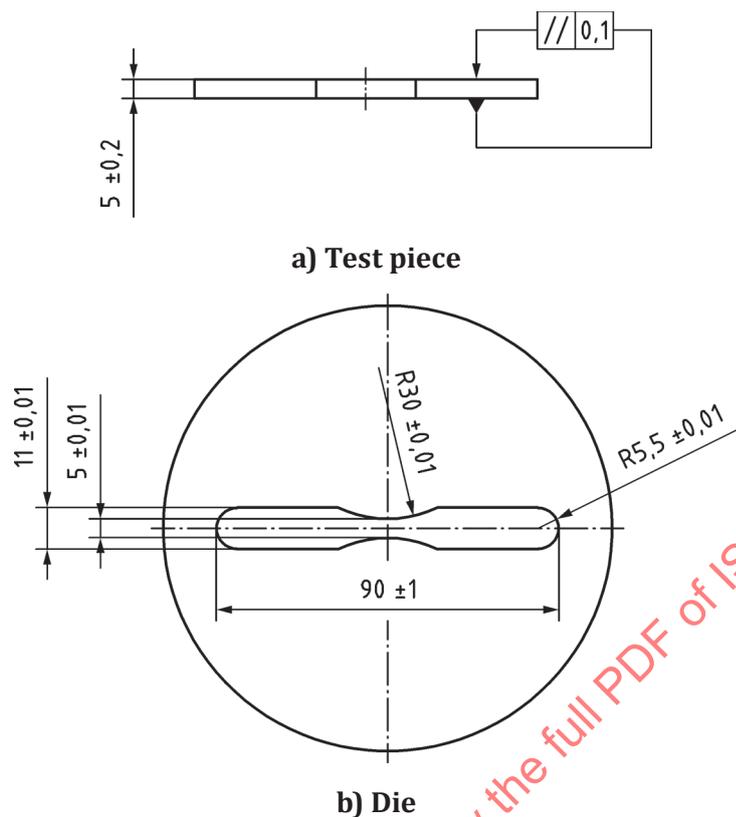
Unnotched test piece and compacting die for use with unnotched fatigue test pieces
